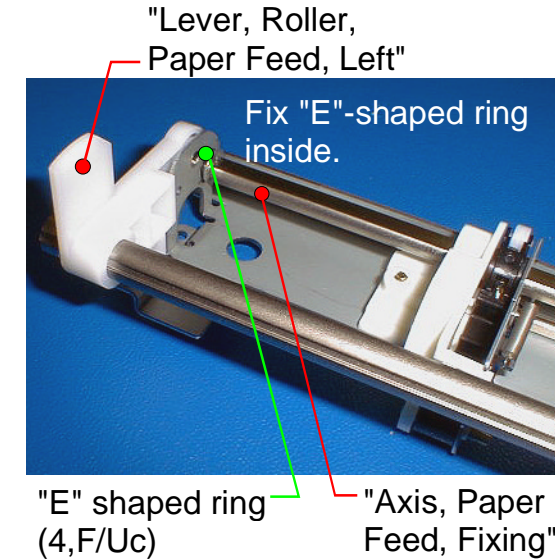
Fixing "Axis, Paper Feed, Fixing"
